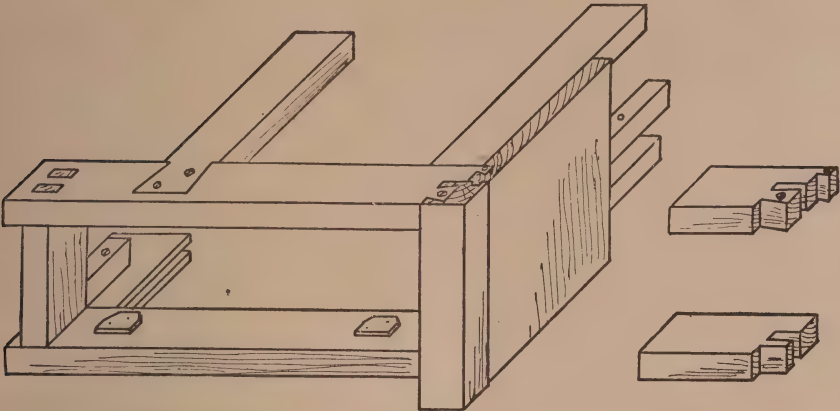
Portion of Chest of Drawers, showing Dovetail and Half-lap Joints
